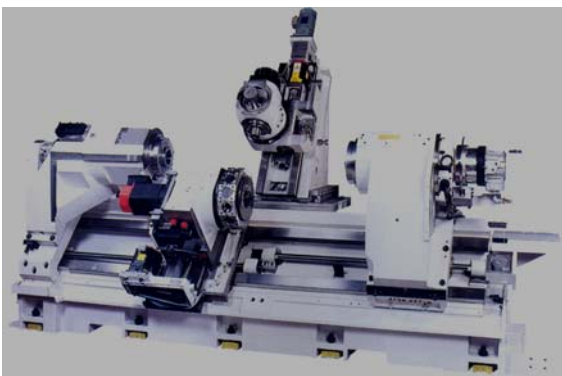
Multi-Axis CNC Lathe using several Servo Motors
